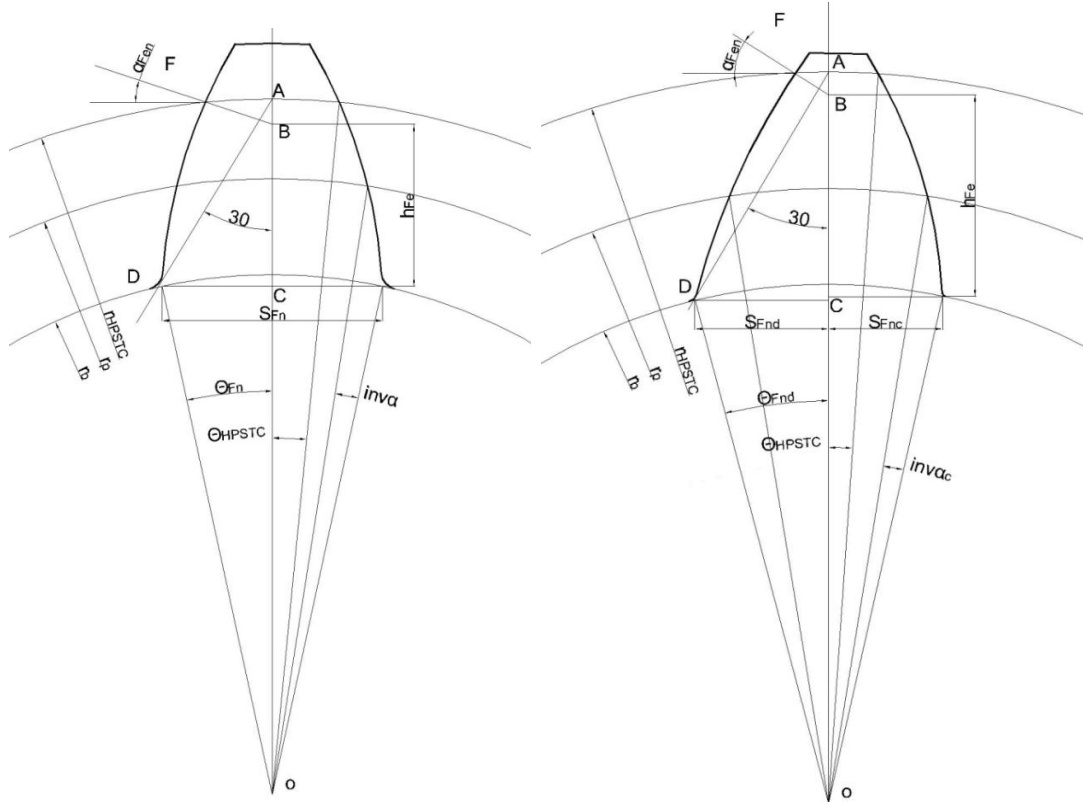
(a): Symmetric involute spur gear tooth (b) Asymmetric involute spur gear tooth
